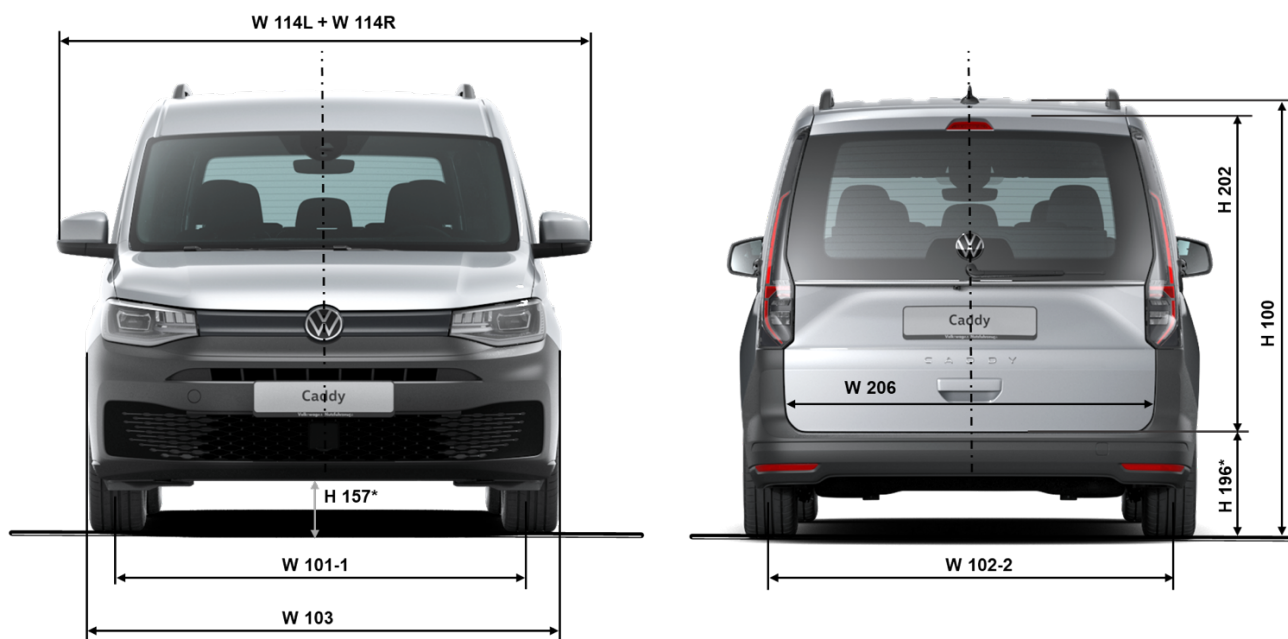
Vehicle dimensions for Caddy/Caddy Maxi, view from front and rear (acc. to DIN 70020, P1)
